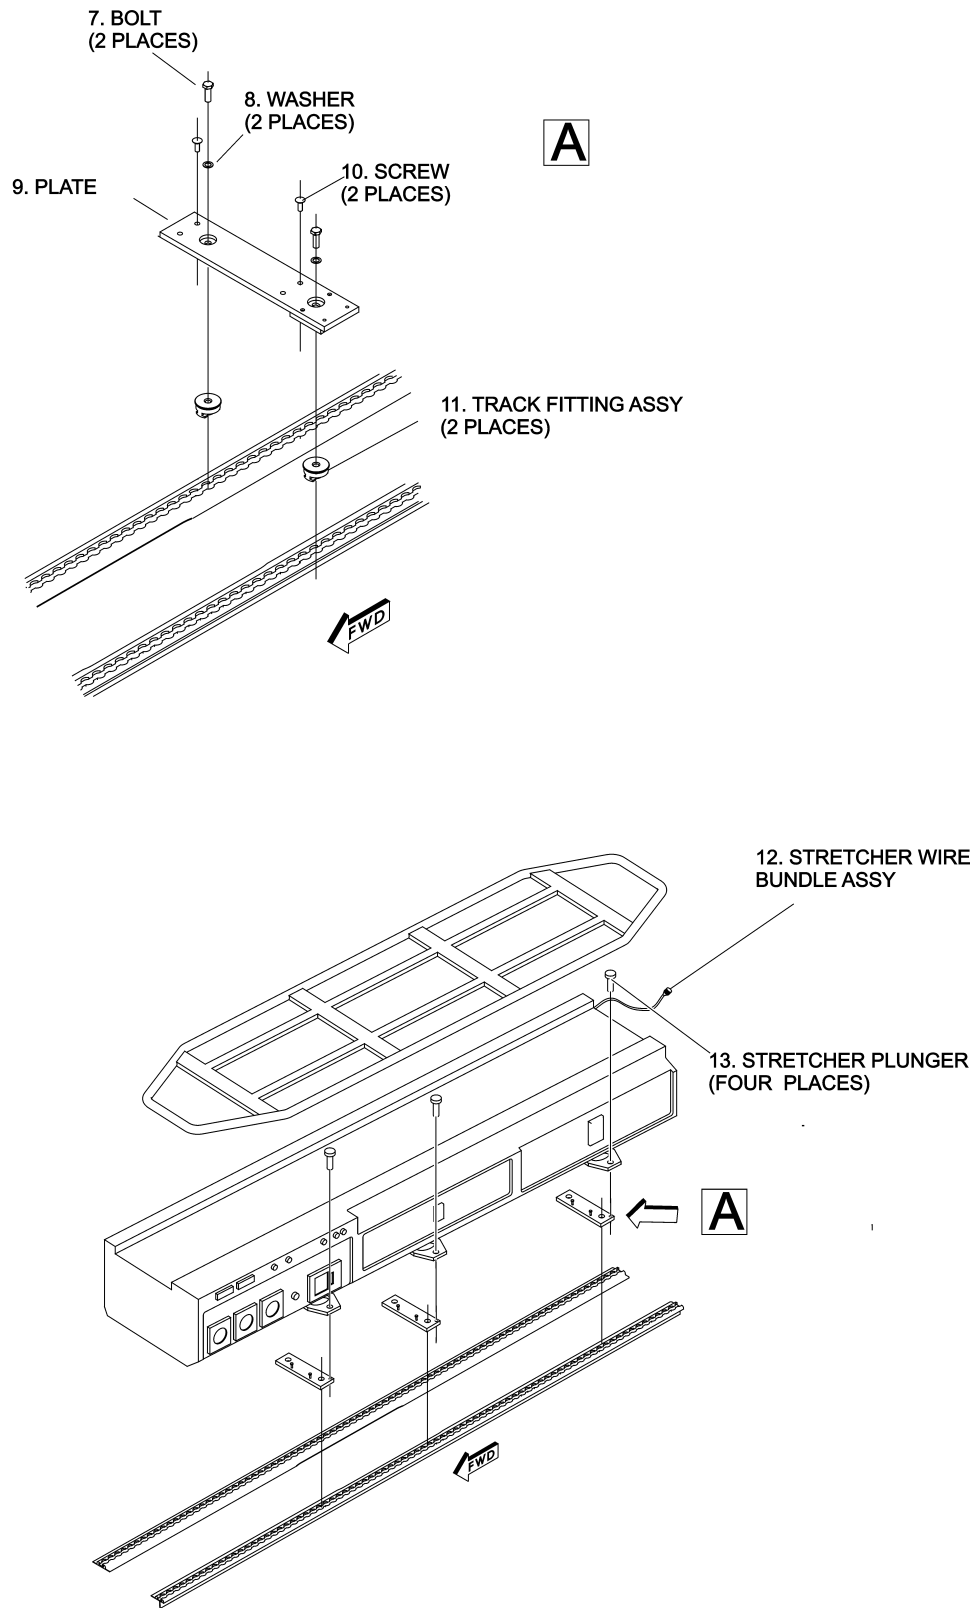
One Stretcher Conf. (NORDAM Corporate 2) - Removal / Instal. (Sheet 2 of 2)
